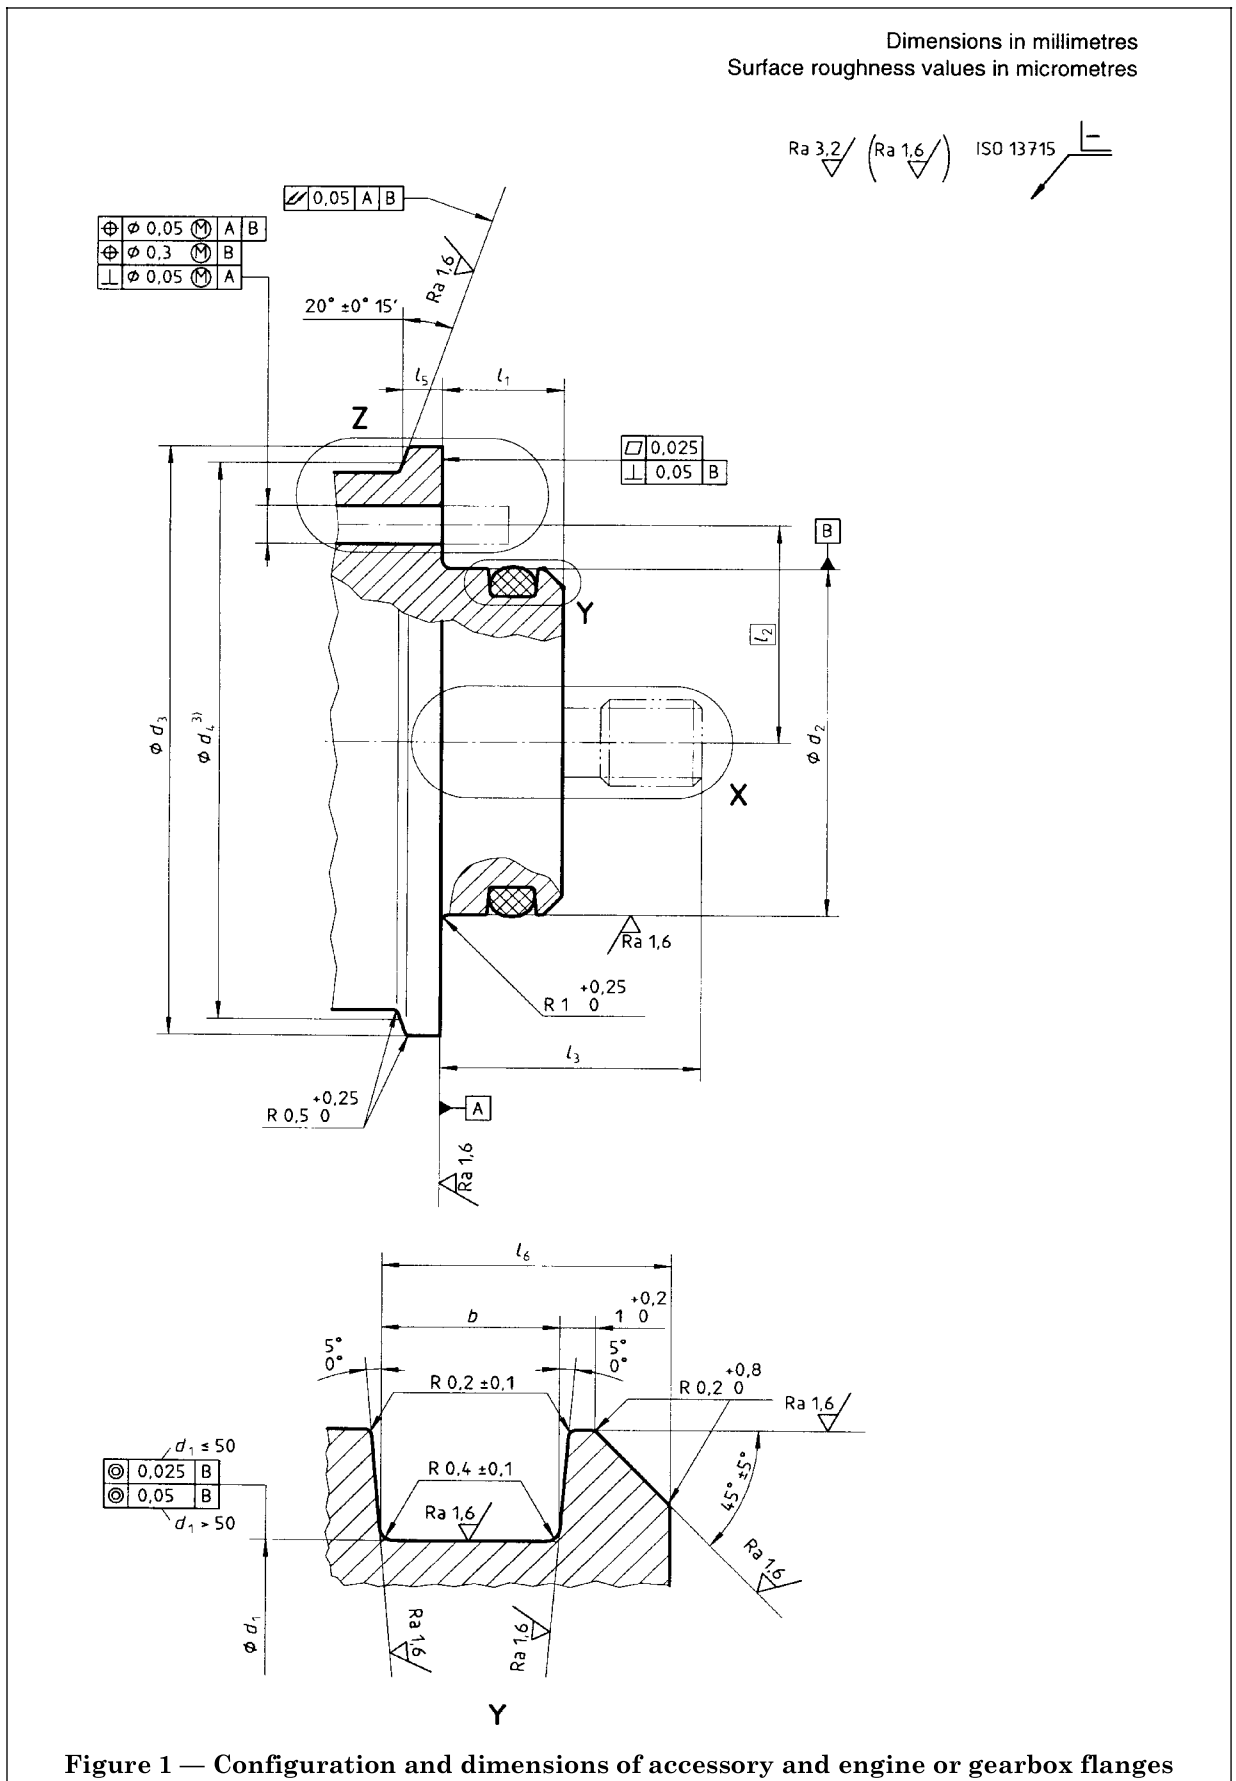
Configuration and dimensions of accessory and engine or gearbox flanges
